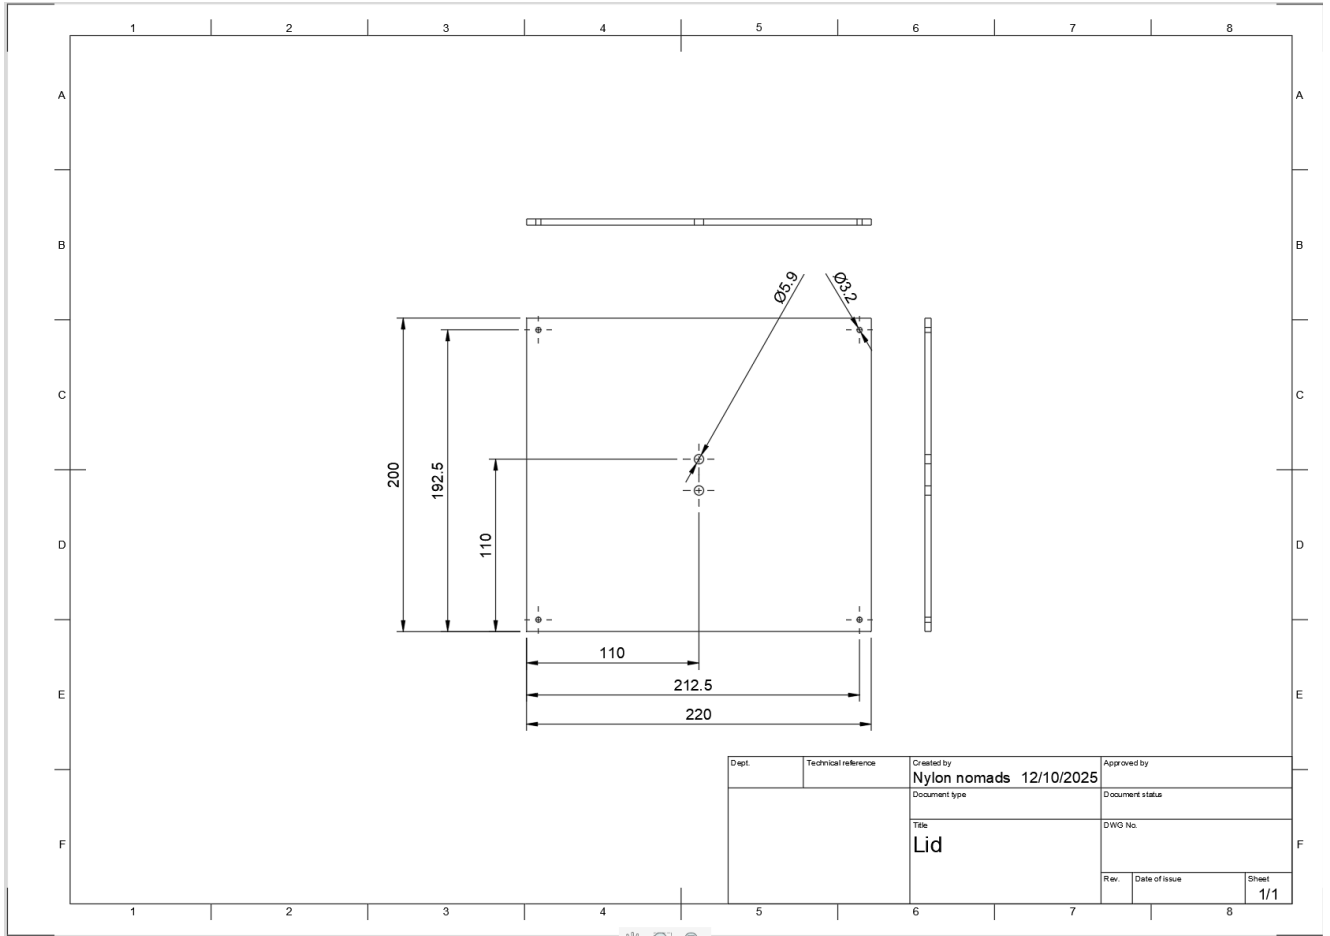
Drawing of Design of Electrical Box Lid in Fusion
